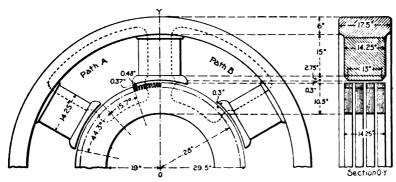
Part of Magnetic Circuit of a Six-Pole Machine.
